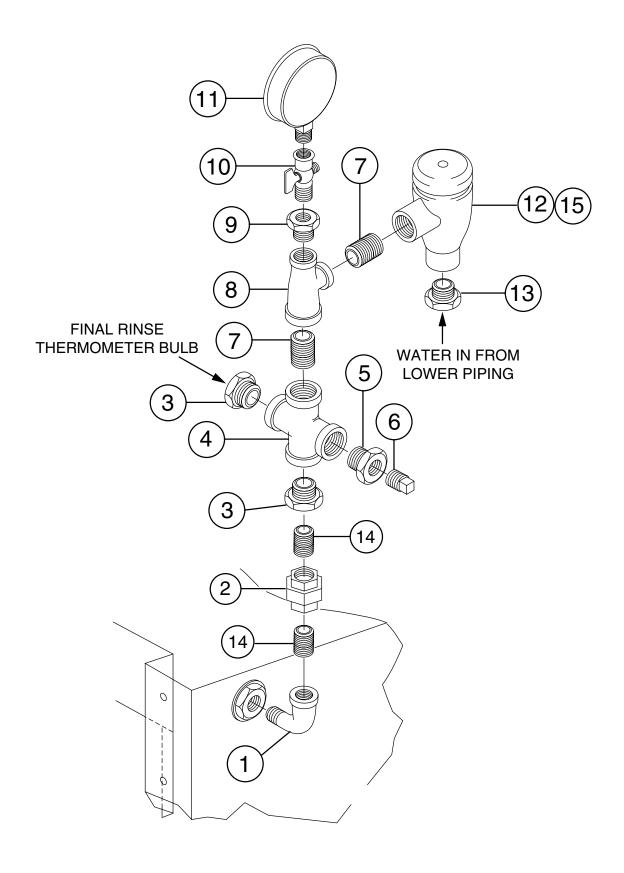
D-HB/D-H1 Upper Fill Piping Assembly
